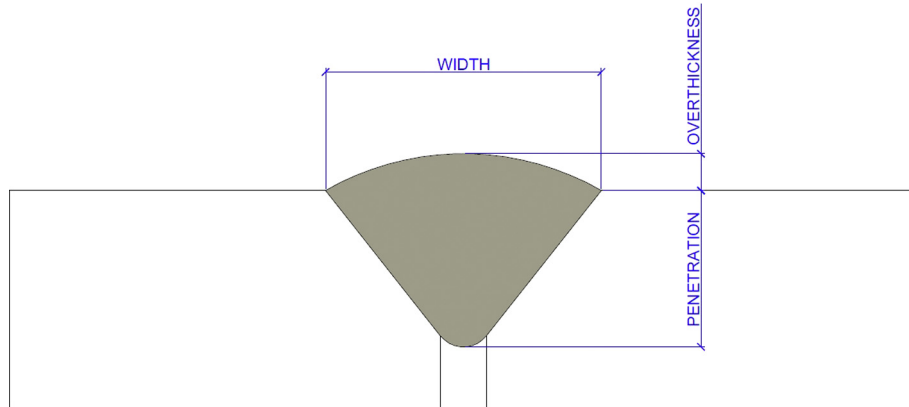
Parameters which define the transversal geometry of a weld bead.
